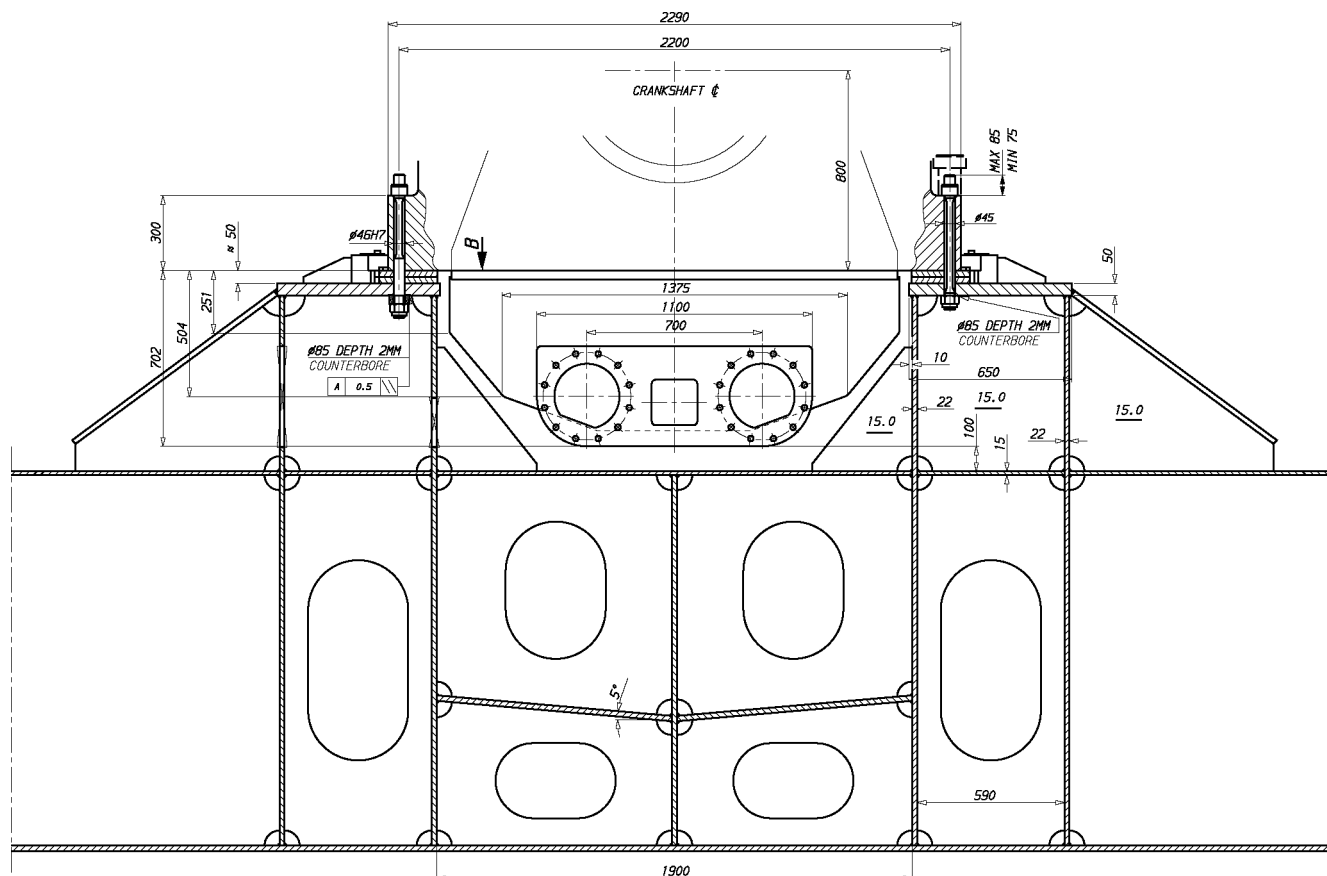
Seating and fastening, rigidly mounted in-line engine on steel chocks (1V69L1651a)
